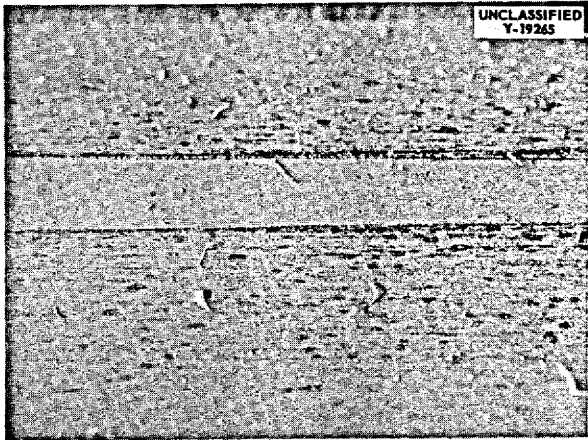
Inside Surface of Weld-Drawn Hastelloy C Tubing.
